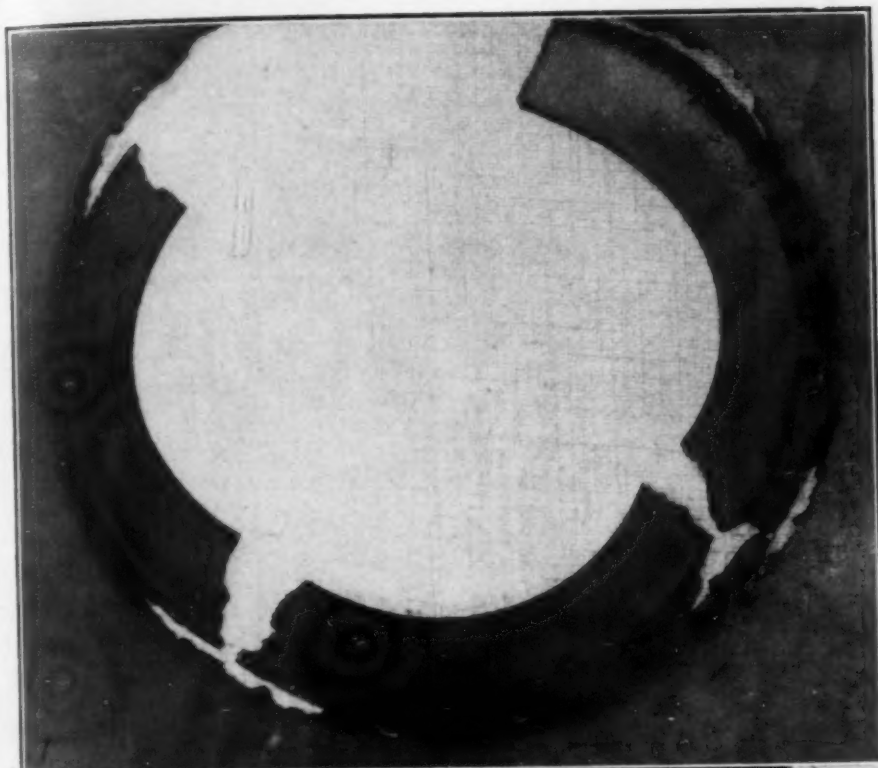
Failure in Forming Bung Hole of Oil Drum Head.
